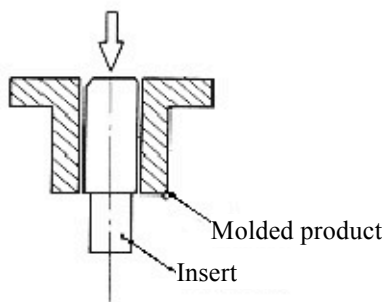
Insert molded product shape and insert holding force measurement method
